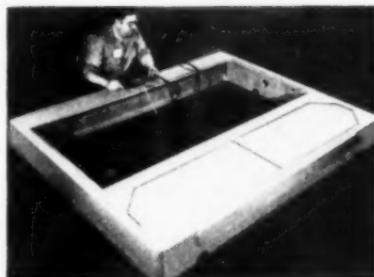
The new welded steel base for 150 KW machine shown in Fig. 1.
